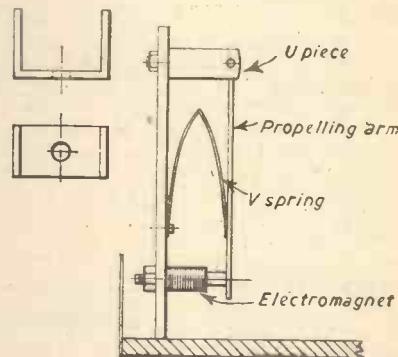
Details of the U-piece and how the V-spring is fitted.
